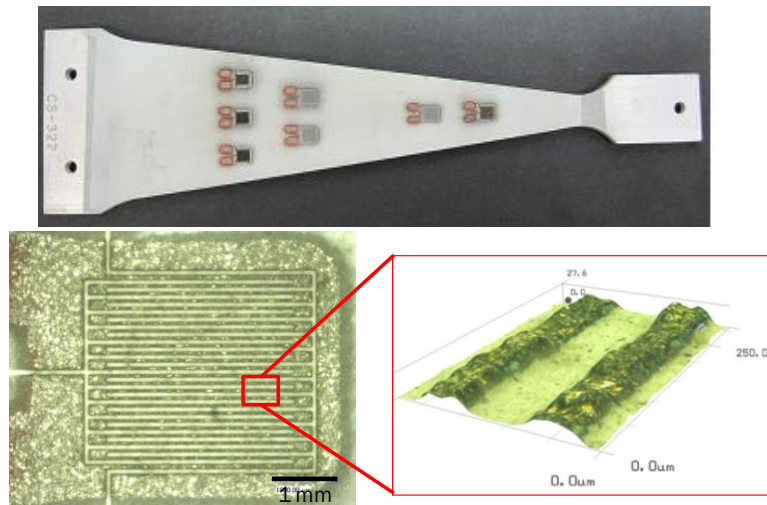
Cantilever sample with laser micromachined strain gauges (top), laser cut strain gauge (bottom left), 3D image of the gauge fingers.
